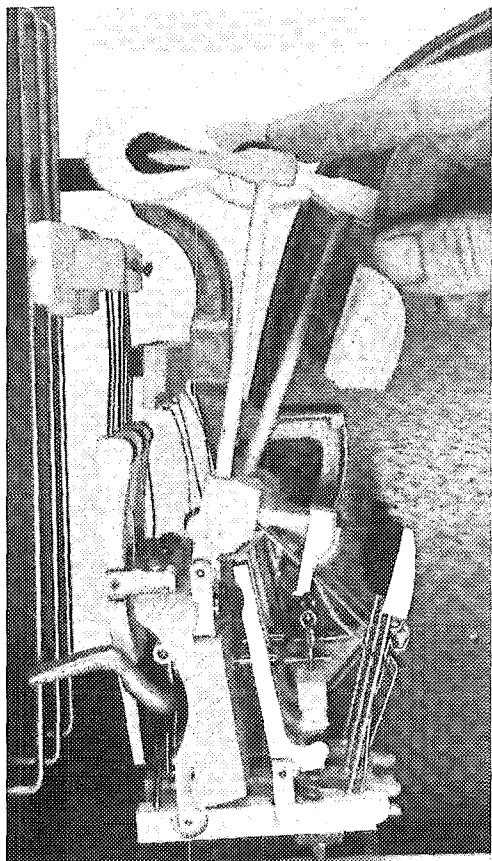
& 9: Align the backcheck heads to the catchers. Important: use only wire bending pliers for this job. Using a damper-type wire bending tool to twist the wires sideways will damage the wippen flange pinning!
